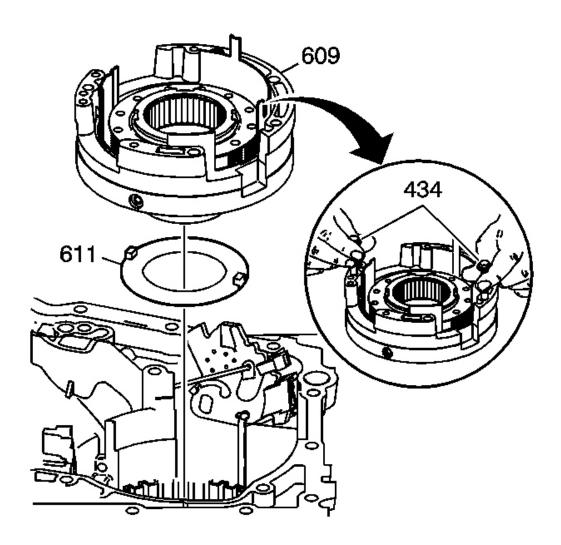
Identifying Driven Sprocket Support Assembly Courtesy of GENERAL MOTORS CORP.
